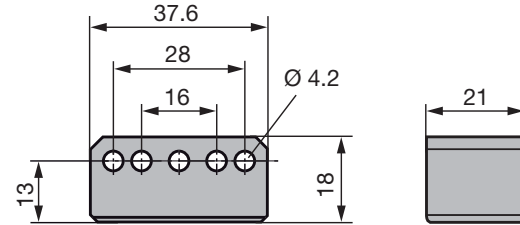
Installation dimensions of BTL6-A-3801-2 magnet
